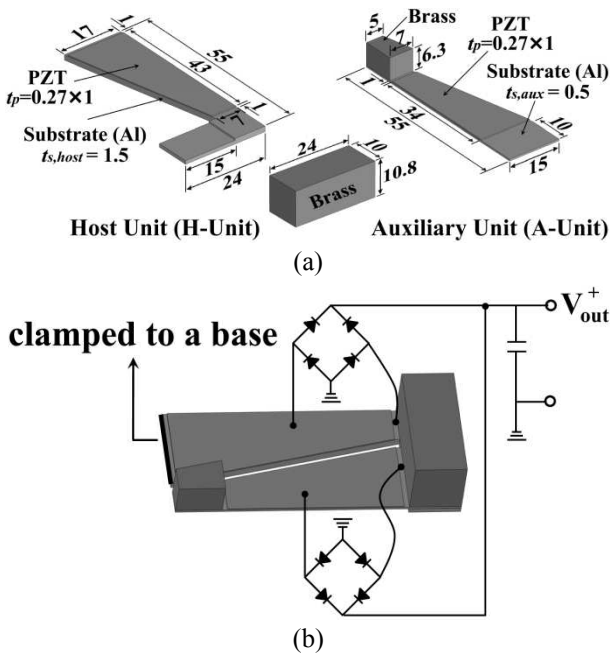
(a) Component units (host and auxiliary) with the geometric dimensions shown in millimeters and (b) the proposed assembled piezoelectric vibration energy harvester
